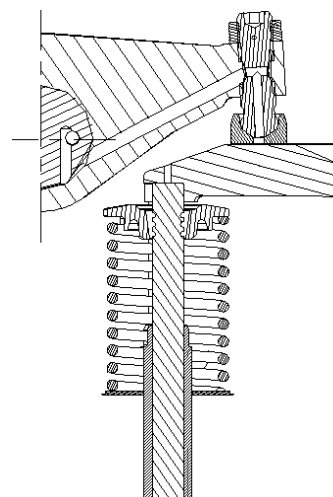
Clearances of exhaust valves under cold status - 0.3mm
